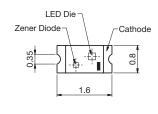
Issue: 1; 17.10.11 22615
